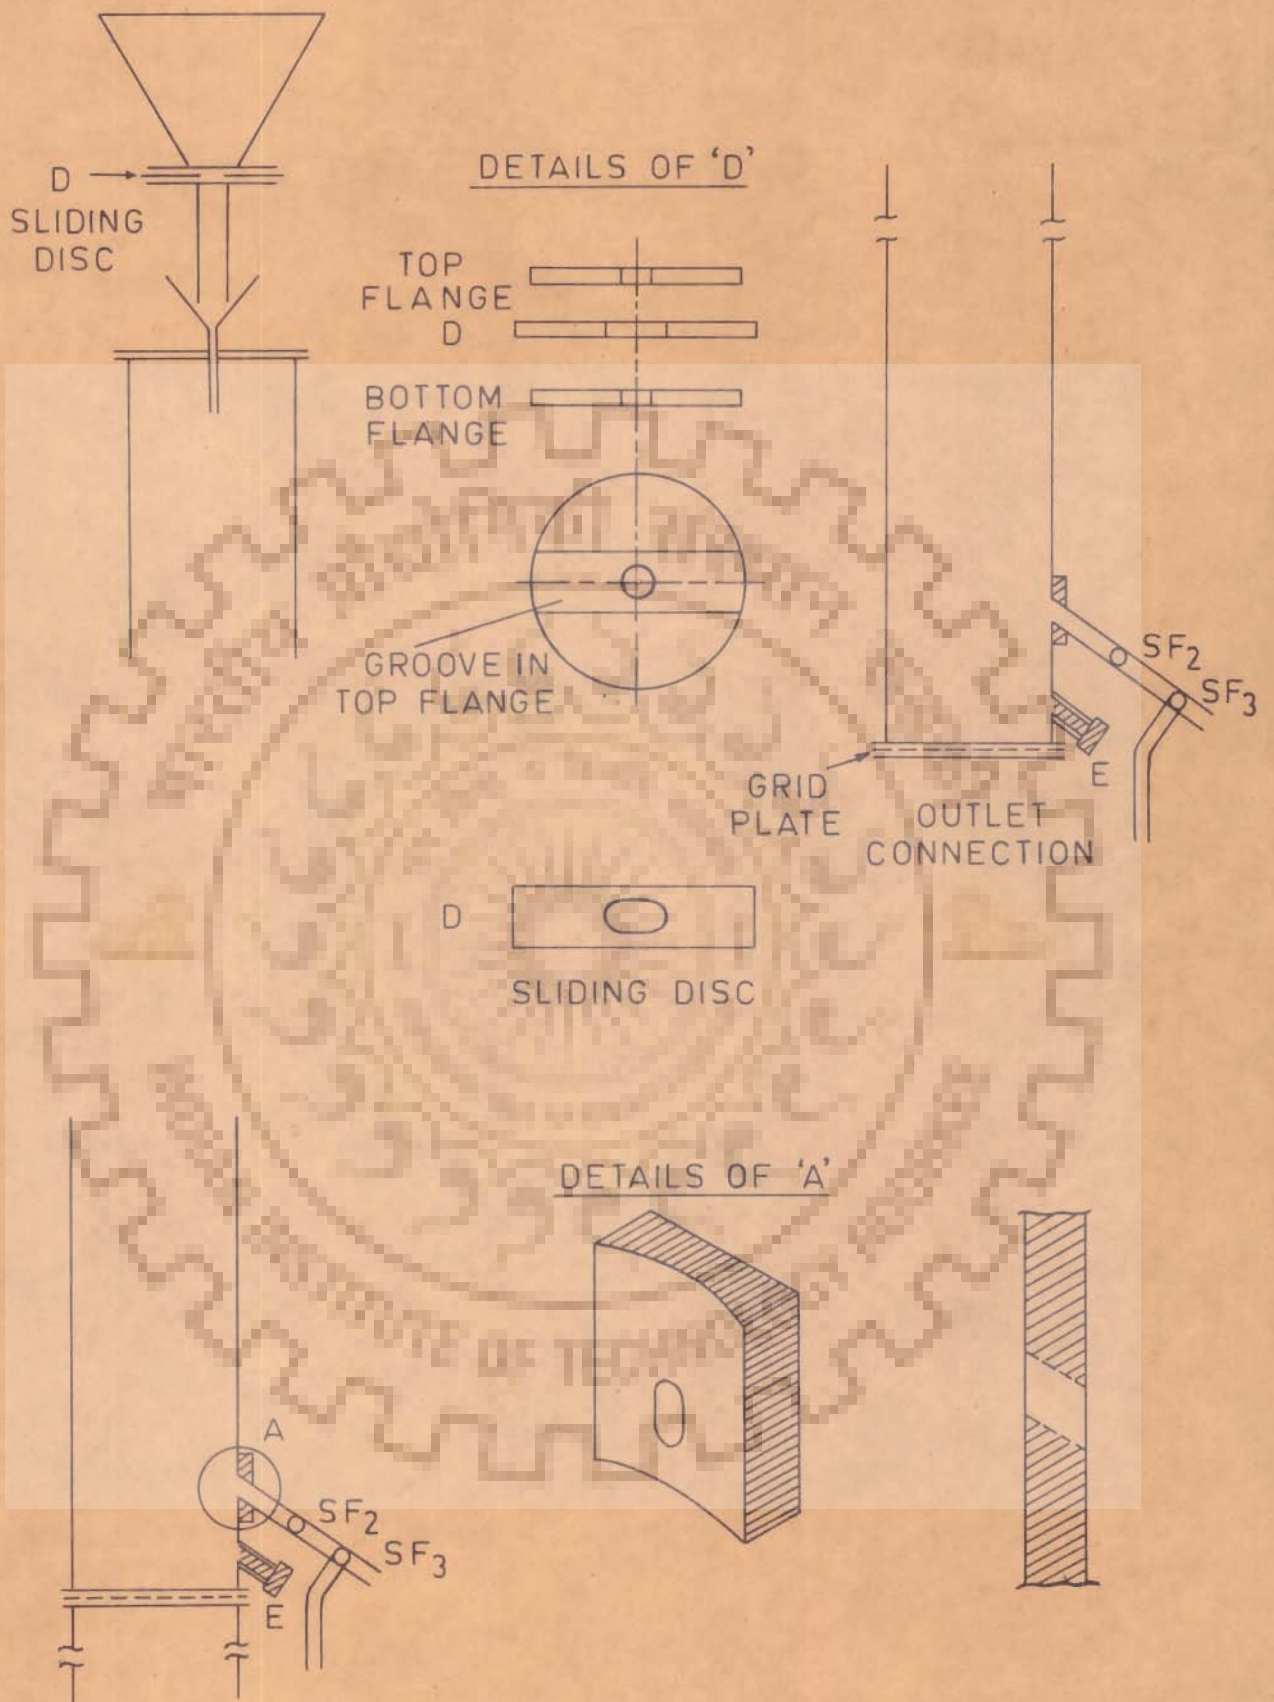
DETAILS OF FEED INLET AND OUTLET CONNECTIONS.
